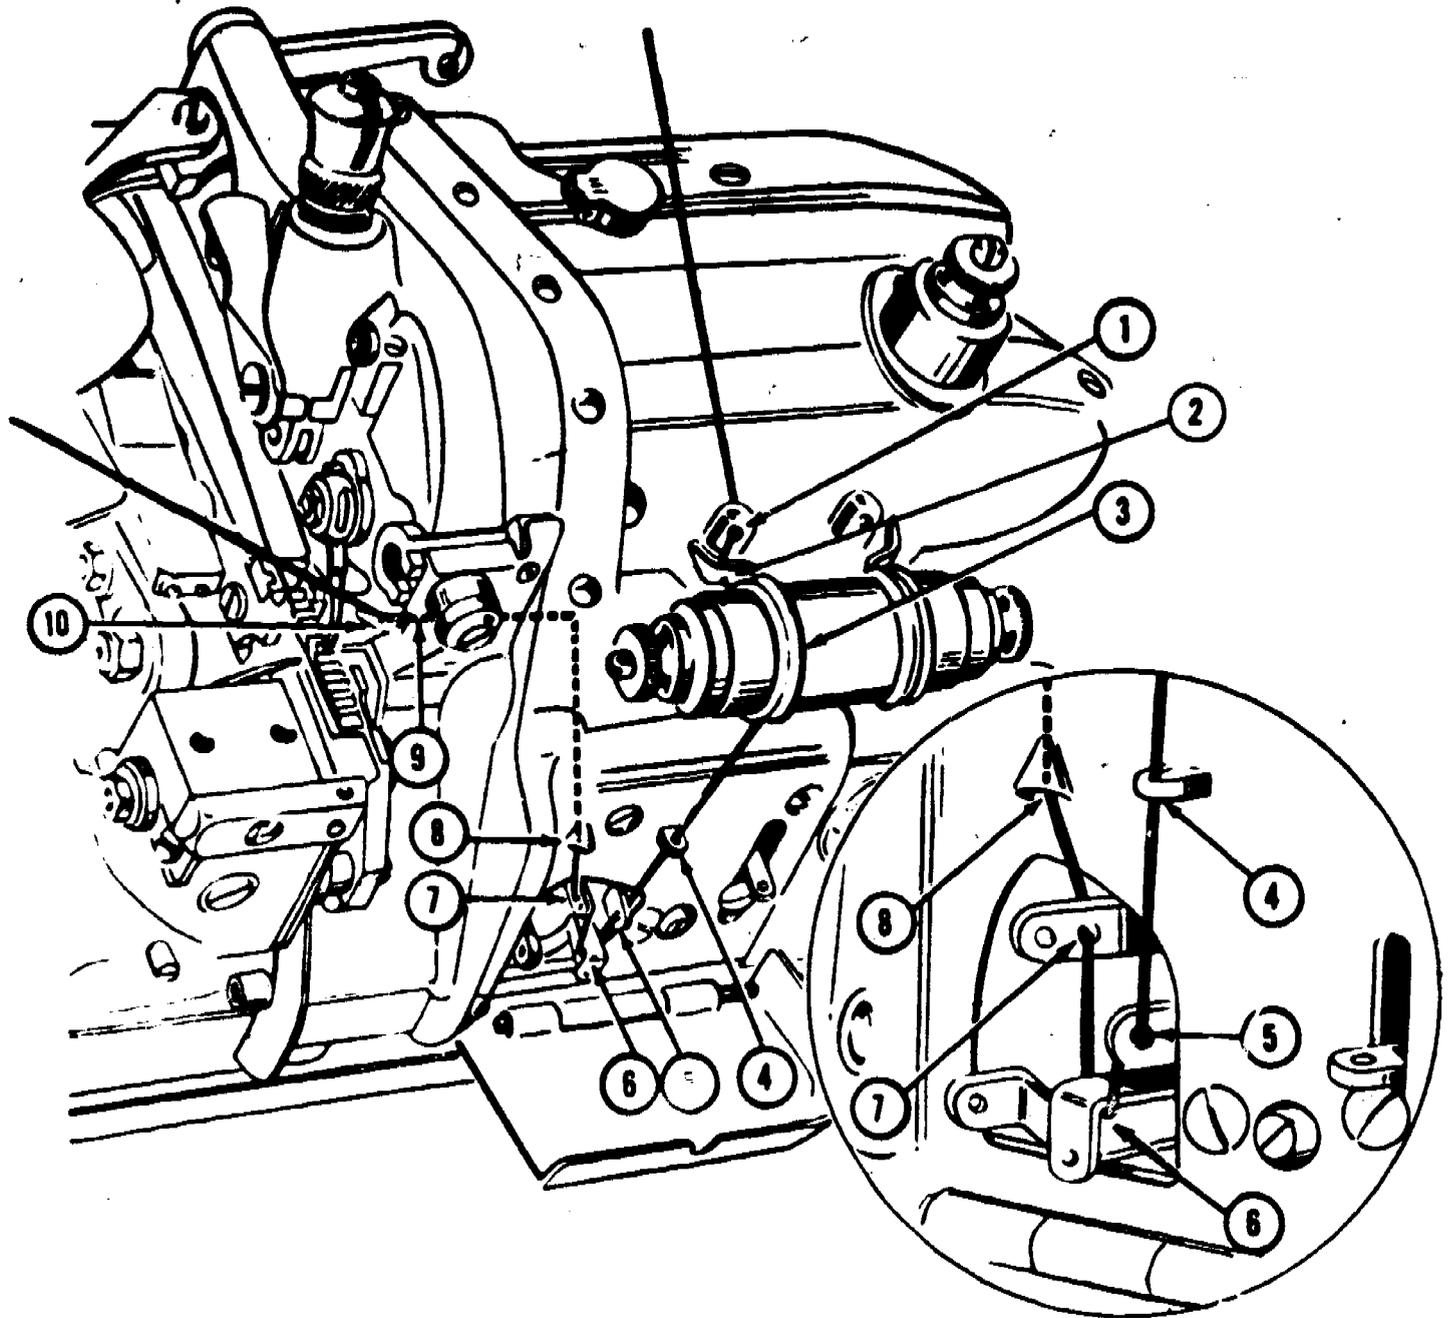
Threading sequence for right looper (overedge sewing machine).
